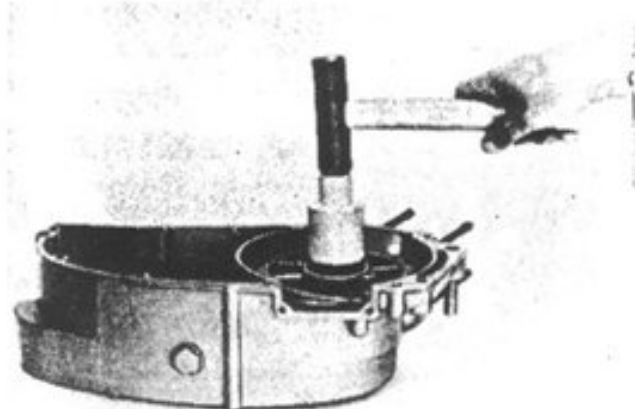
Pressing-in the ИЖ-Ю-3 motorcycle oil seal.
